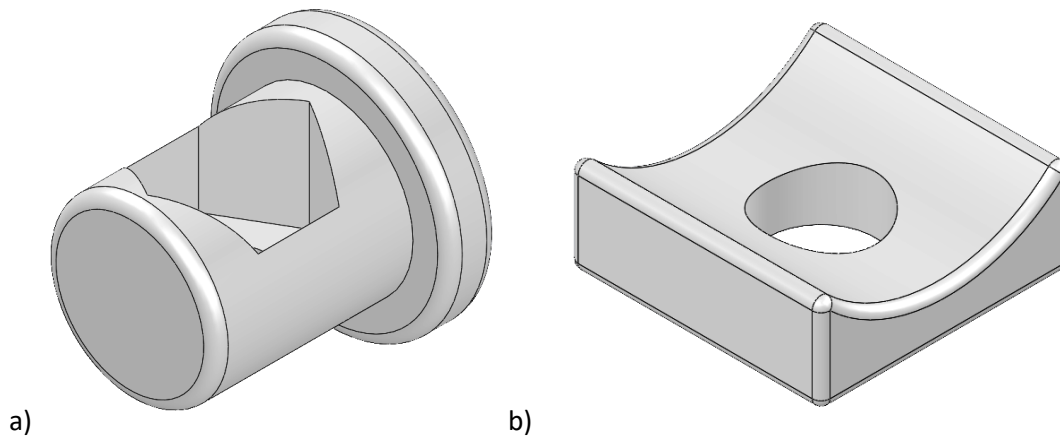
Quick release mechanism's cam components: cam (a), and cam seat (b)
